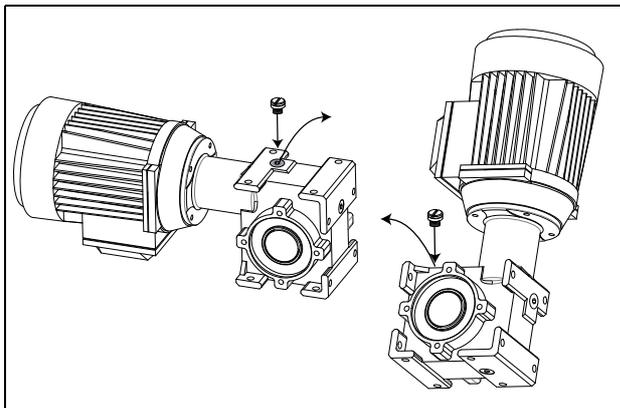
Remove the plug in highest position and replace with the ventilation plug.
